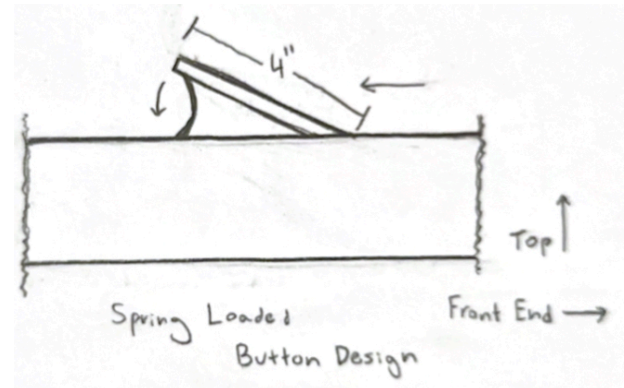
Drawing showing design of pressure-activated button incorporated into the board surface. When the board is placed, the button will press down and start the timer coded on the Arduino Uno.
